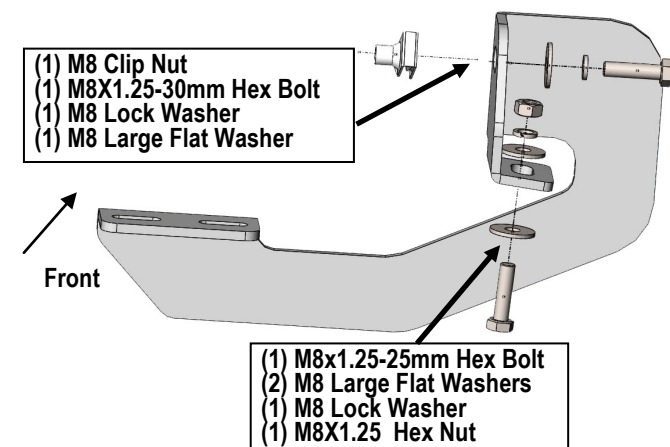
Driver Front Mounting Bracket (DFM/PFM) Installed
